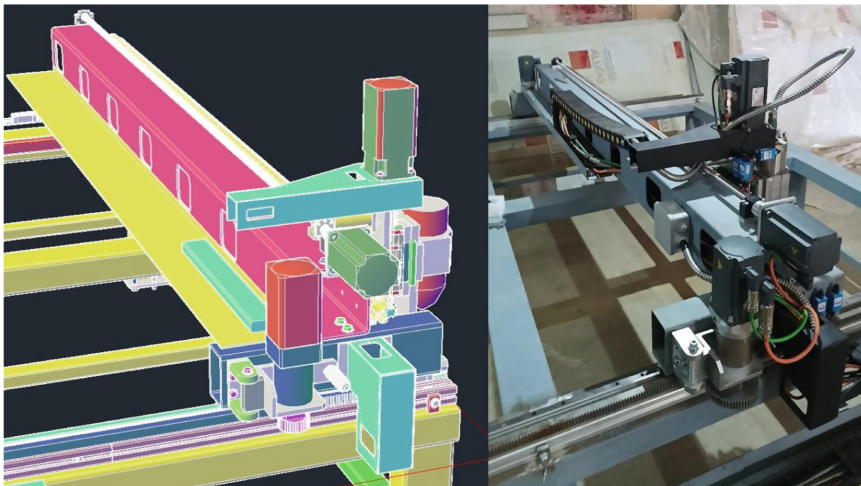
Portal large dimensional machine. CAD-model and prototype.
